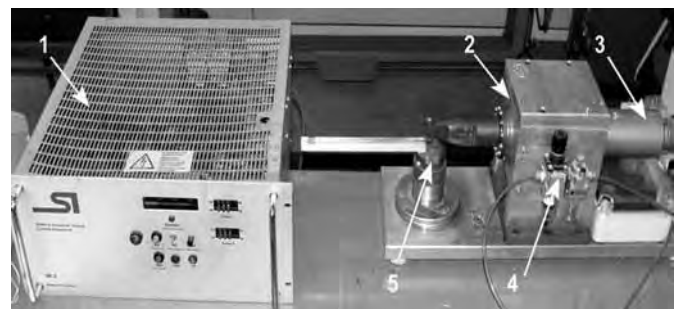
Specialized equipment for ultrasonic welding of Cu-Cu.
